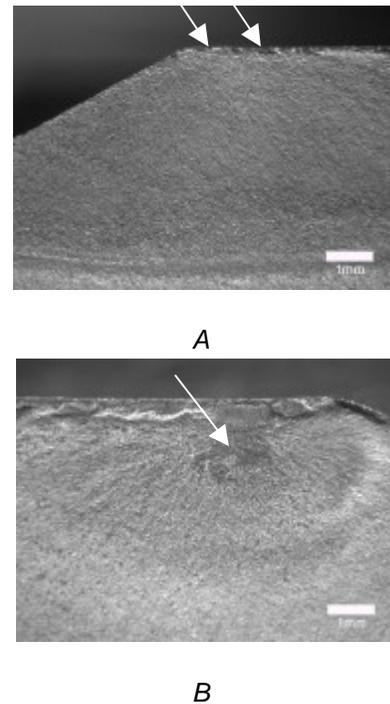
(A) Fracture surface of shot peened specimen showing multiple surface initiations indicated by the arrows. (B) Fractograph showing subsurface initiation in LPB specimen.
